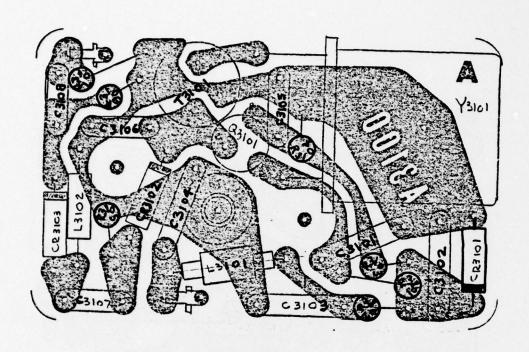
P.C. BOARD LAYOUT FOR THE A3100A CRS HARMONIC GENERATOR ASSEMBLY
